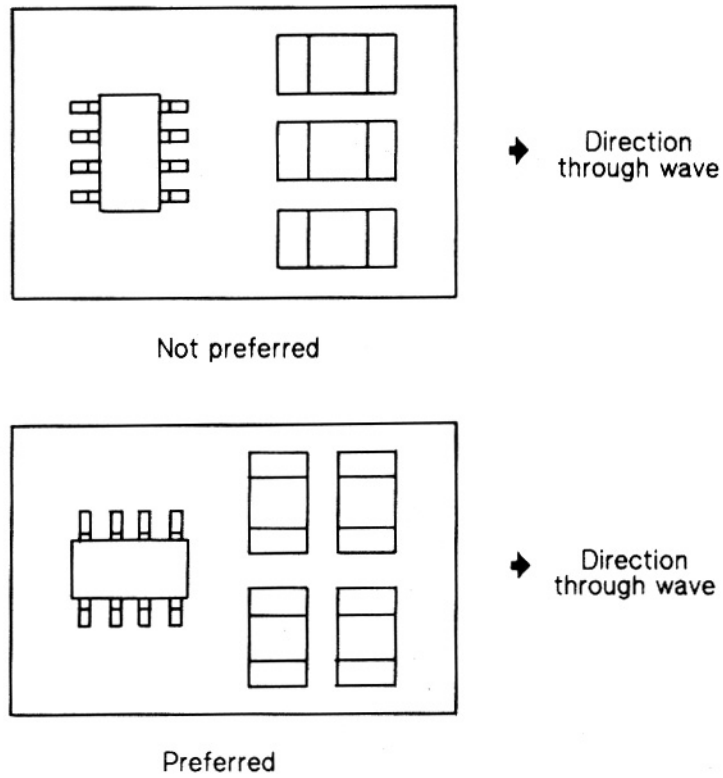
Preferred and not preferred directions of SMD components during wave soldering.
